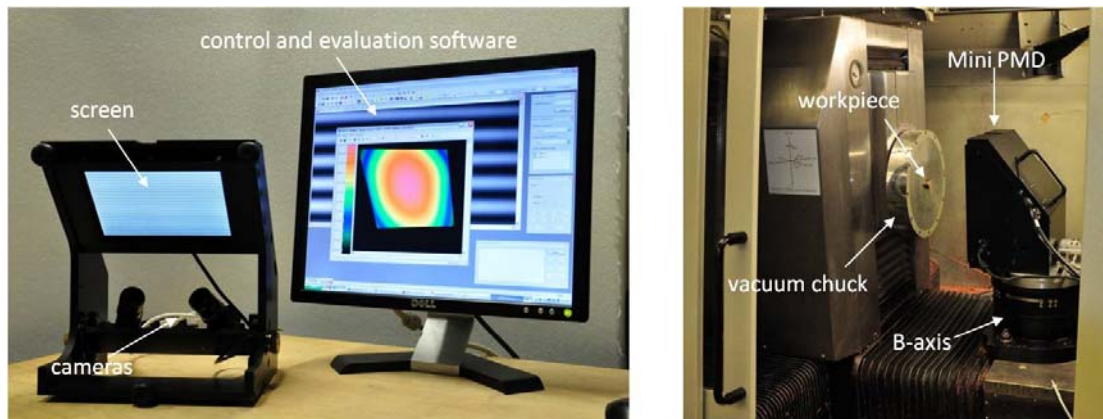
Miniaturized PMD setup developed for machine integrated measurements inside an ultraprecision diamond turning machine. Left: Setup with open casing. Right: Setup within the ultraprecision lathe. For the actual measurement, the setup is moved closer to the chuck, obscuring the workpiece behind the side panels to prevent stray light²⁷.
